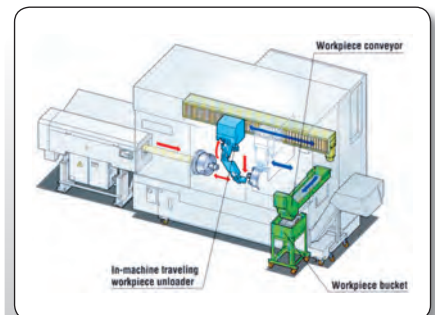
Automatic workpiece exchange at the CNC lathe-type machining centre [Mori Seiki]
